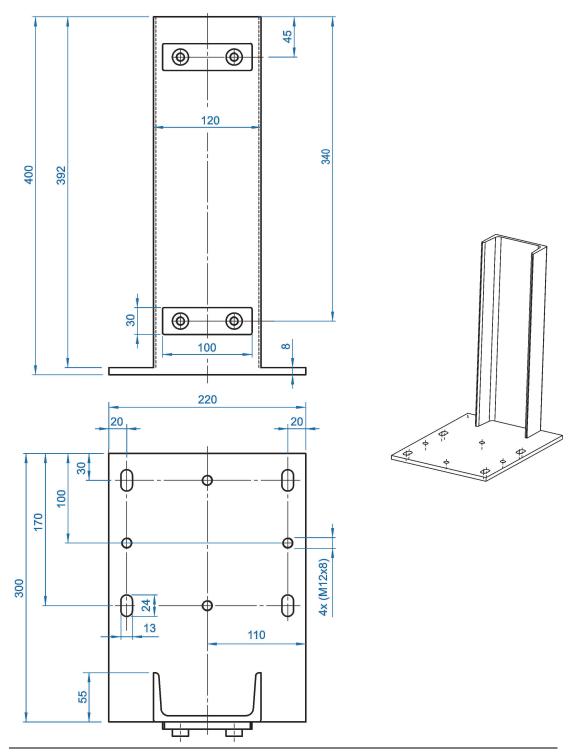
Holder bracket (NOZ00 HAL90) for rod sensors
